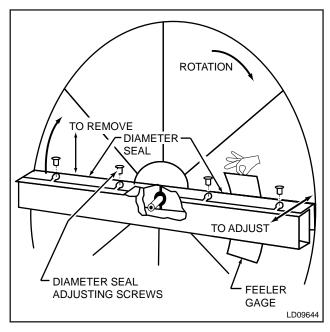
DIAMETER SEAL ADJUSTMENT
